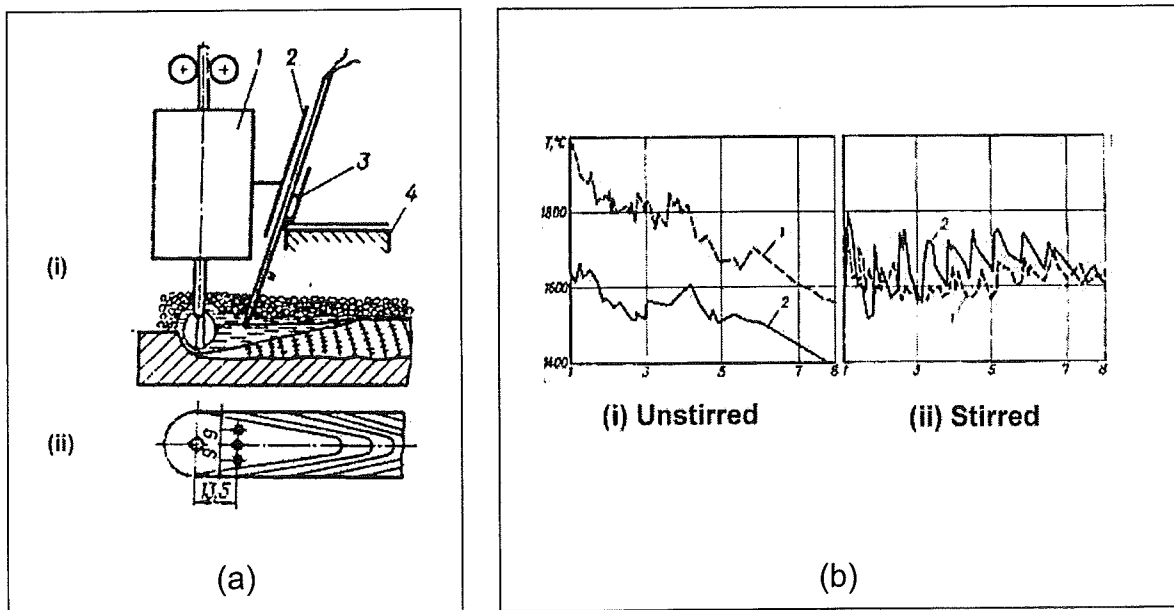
(a) Temperature measurement set-up (i) side view and (ii) top view, 1-welding torch with coil, 2-guides, 3-moving part with thermocouple, 4-stationary part; (b) Diagram of temperature distribution in the weld pool of Kh18N9T steel during TIG welding (i) without stirring and (ii) with stirring. Line 1 shows the temperature at the weld centreline, while line 2 shows the temperature near the weld pool boundary [27].
